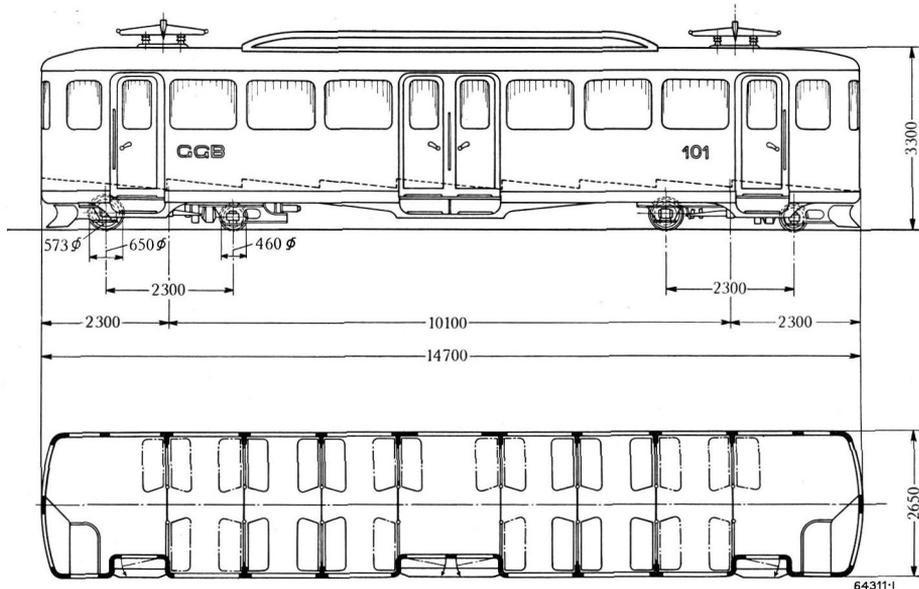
Motor-coach for three-phase 725 V, 50 cycles, under construction for the Gornergrat Railway. Electrical equipment: Brown Boveri. Mechanical part: Swiss Locomotive and Machine Works, Winterthur.
